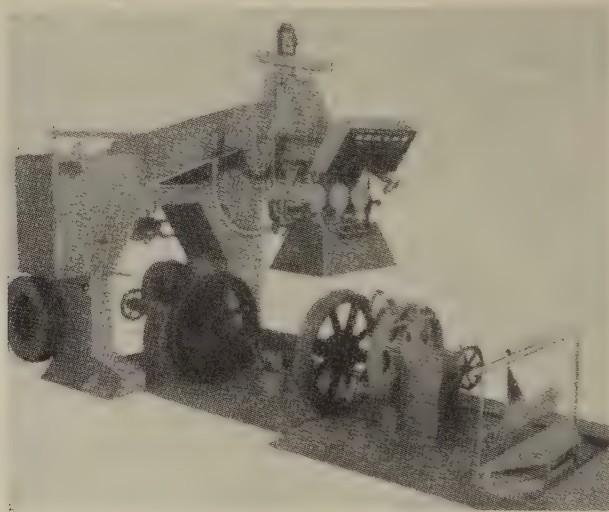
Installation for welding the flanges of wagon wheels,
